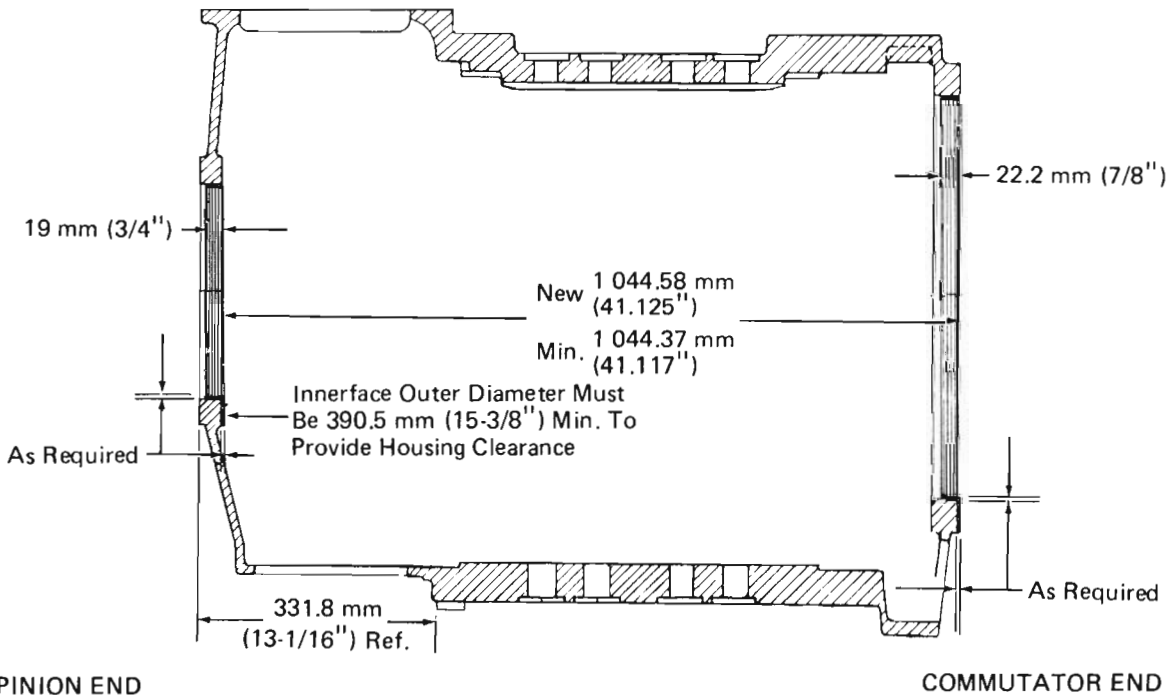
Pinion End And Commutator End Armature Housing Bore Welding
